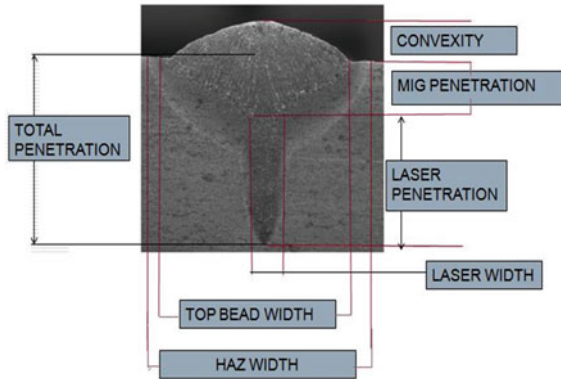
Macro cross section of a typical laser-MIG hybrid weld bead on plate
